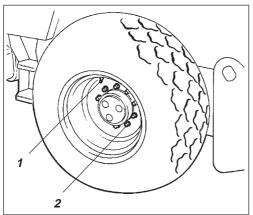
Wheels 1. Air valve 2. Wheel nut
